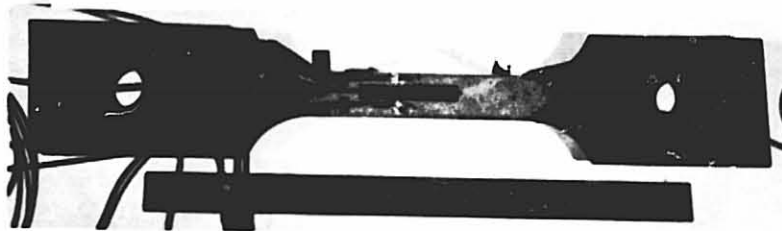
Test specimen with AILTECH gage, dual center thermo-couples, and collimator target tips
